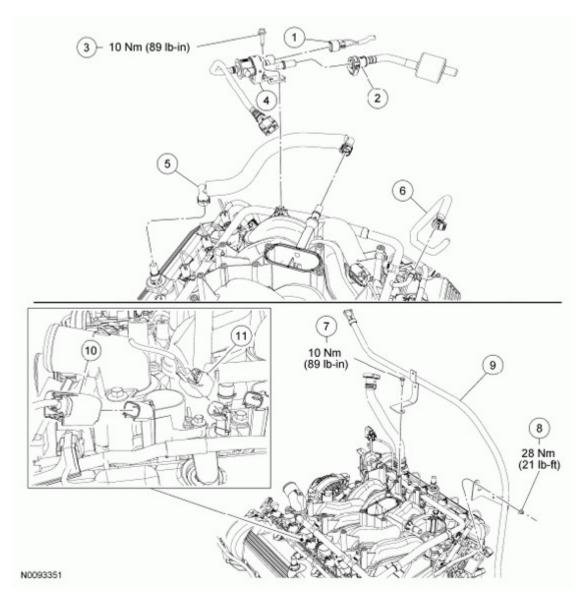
Identifying Evaporative Emission Purge Valve, PCV Tube And Fuel Supply Tube Quick Connect Coupling With Torque Specifications
